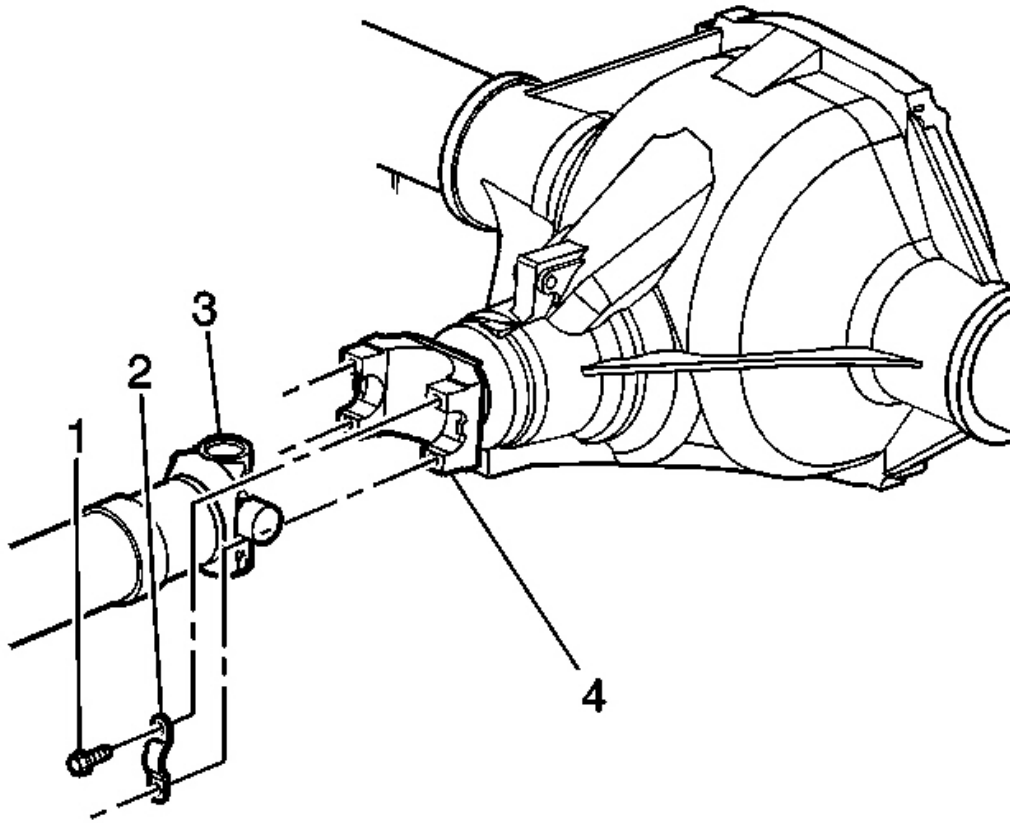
Rear Propeller Shaft & Rear Axle Pinion Yoke
